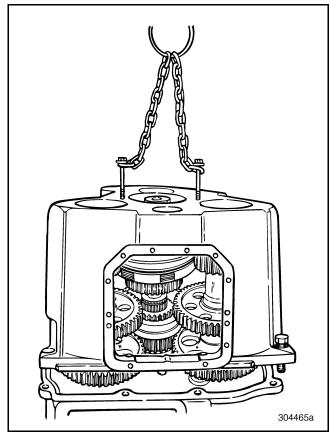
Removing Rear Case (T313L/T318L Shown)
